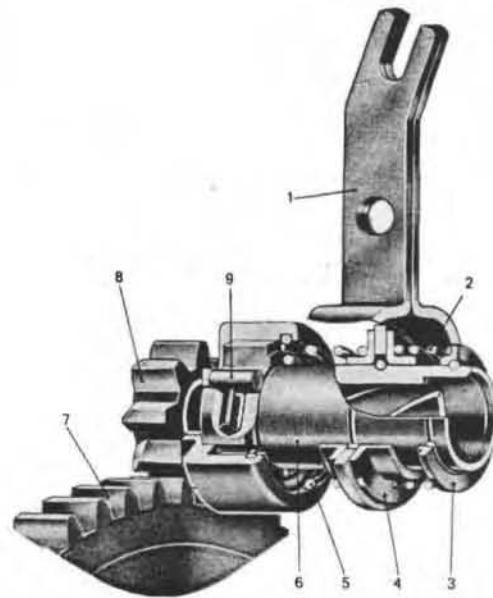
Cutaway view of the thrust-screw combined coupling device.
